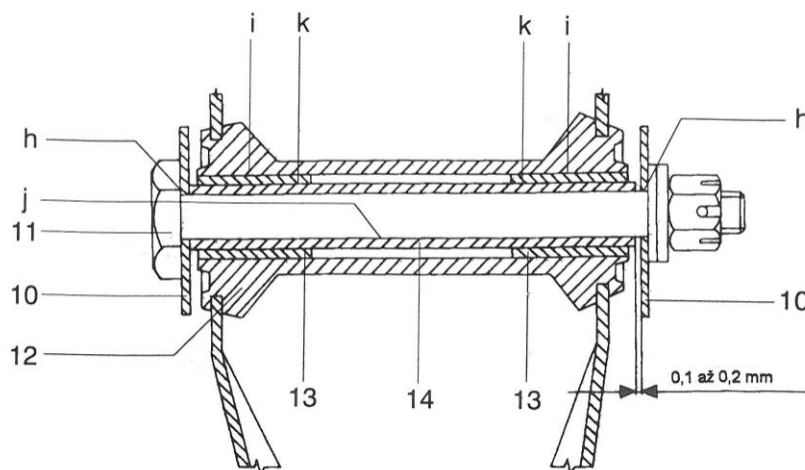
Dimensions, allowances and plays in elevator control fittings
